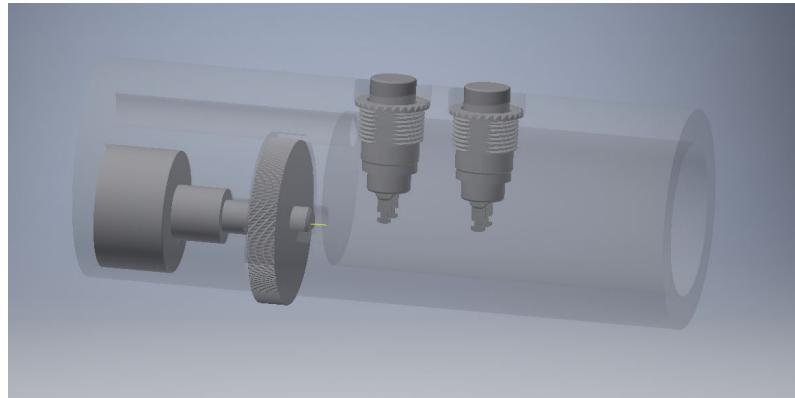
CAD design of the remote device, (push buttons C&K 8532T1ZBE2) (Rotatory sensor CTS 285CCDFSAAB4C1)
